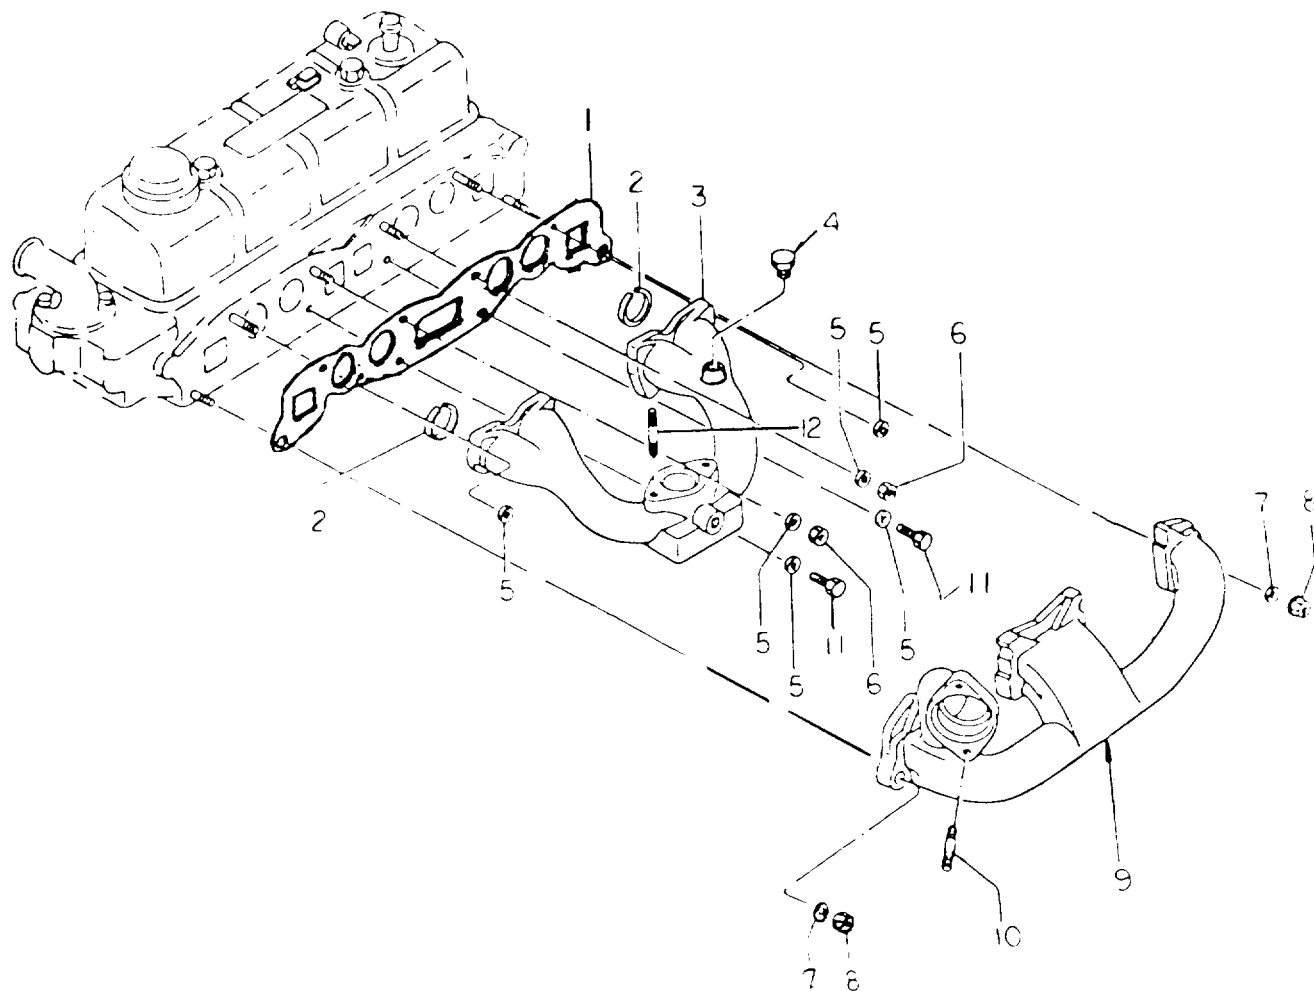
INTAKE & EXHAUST MANIFOLD
